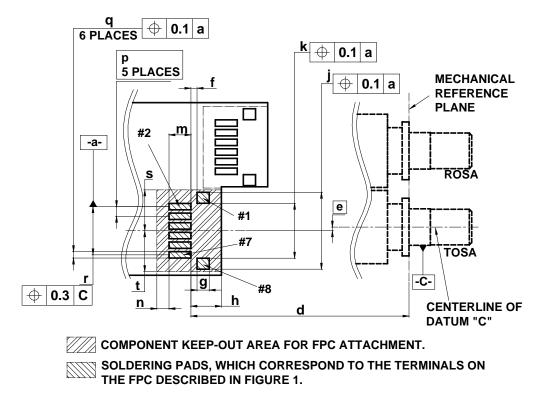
Recommended pattern layout for the PCB in a CFP or QSFP+ package transceiver
